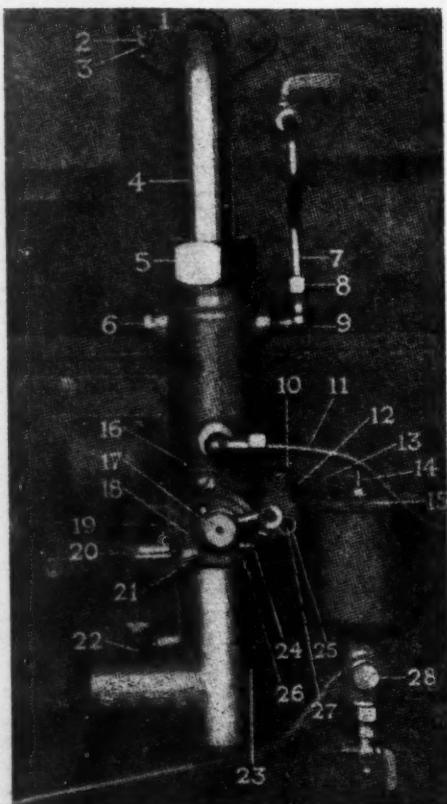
Showing the carburetor used on the white T.B.C. 2-ton truck
